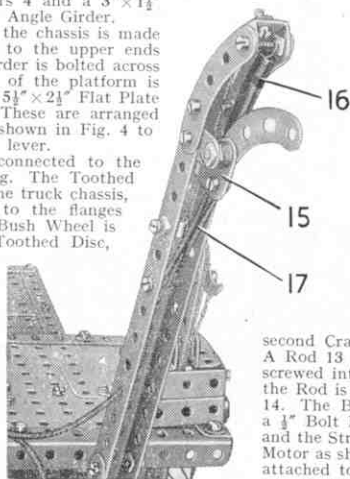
A detail view of the control handle showing the arrangement of the brake lever.
